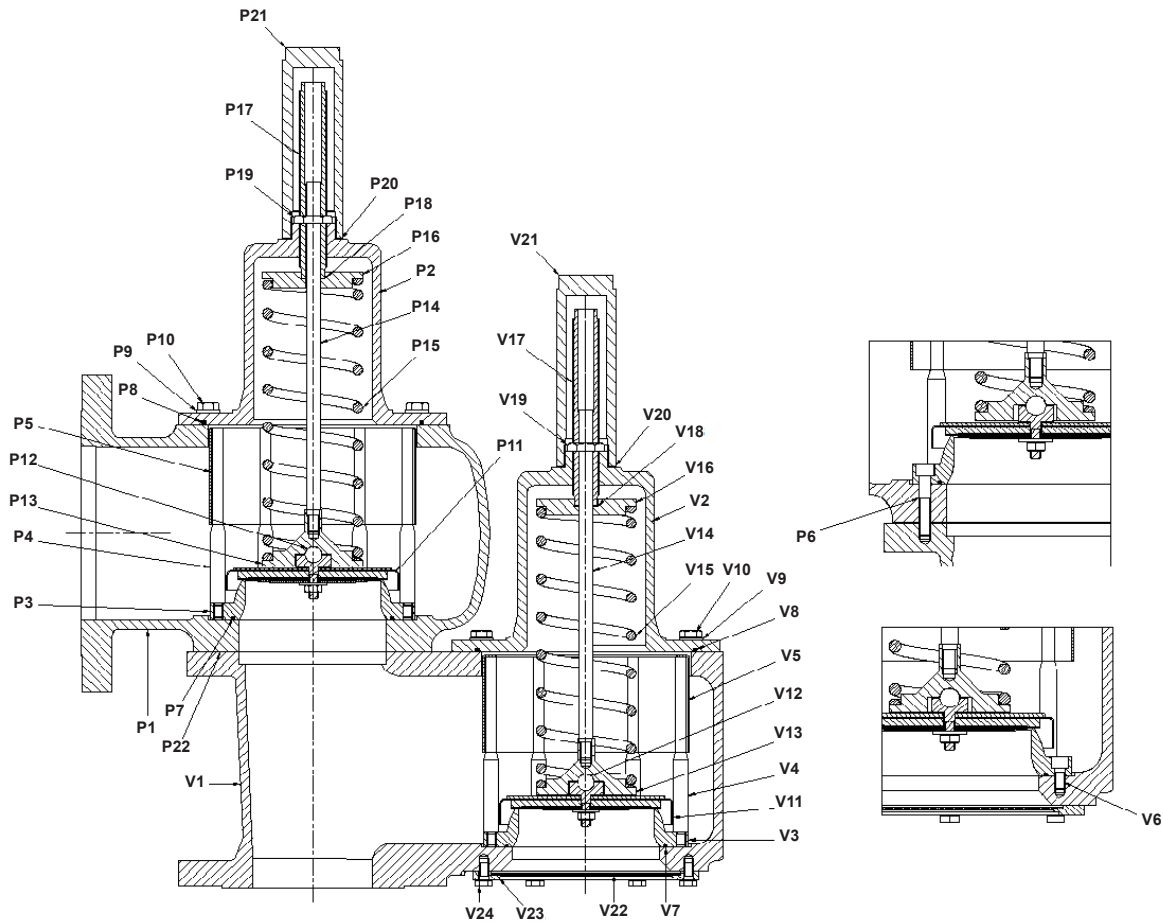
Type 4040HC Pressure and Vacuum Relief Valve Assembly
